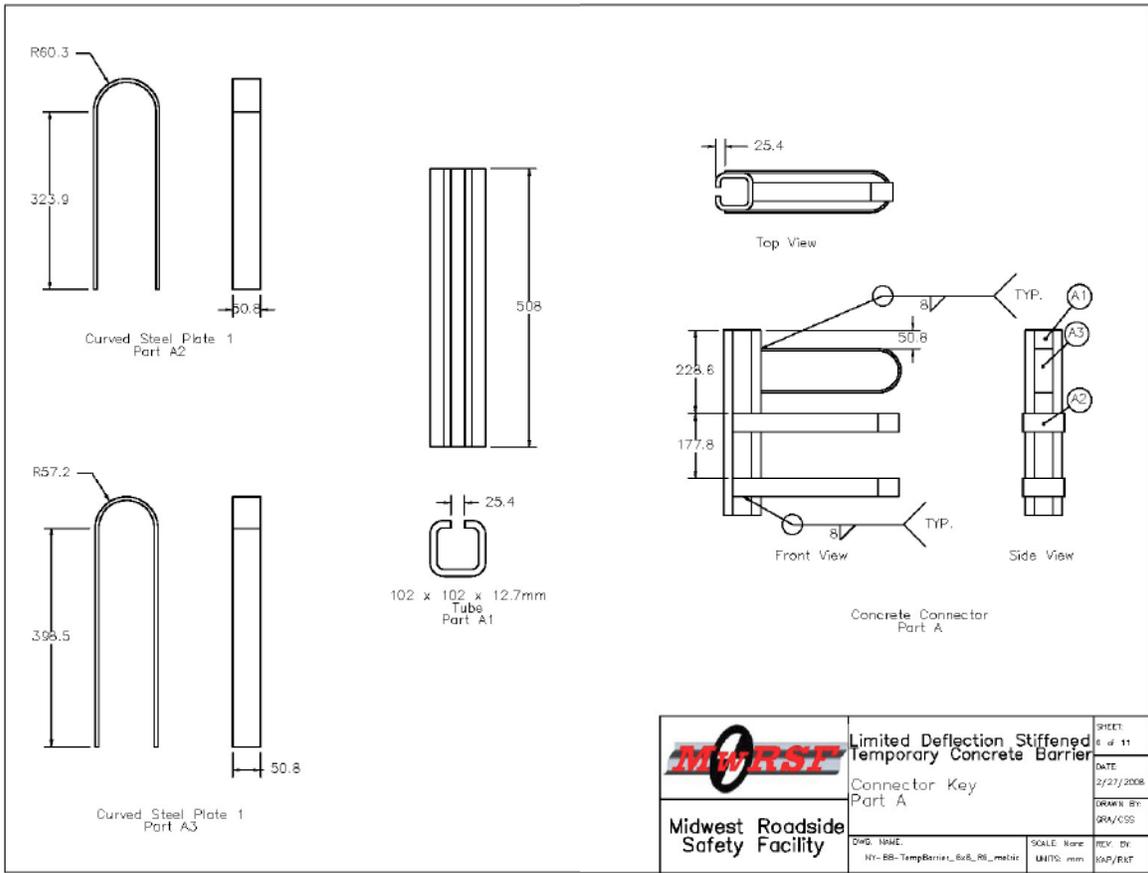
Temporary Concrete Barrier Connector Assembly Details, Test NYTCB-3
